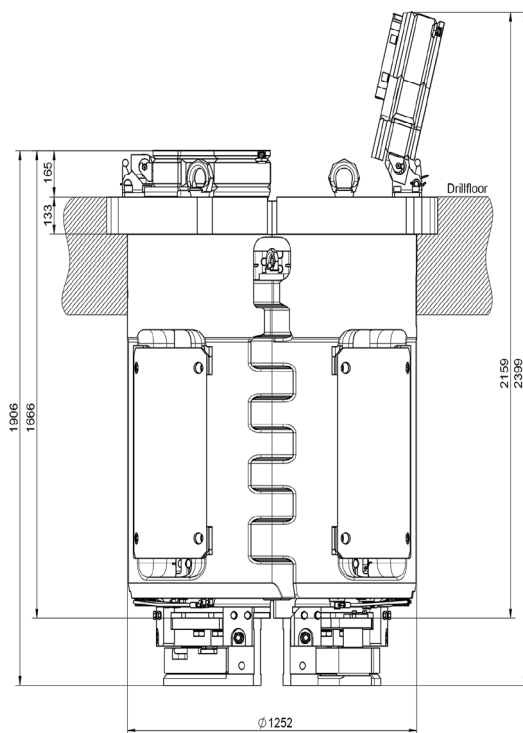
Primary dimensions (National 49 1/2" RT with Bottom Guide)
